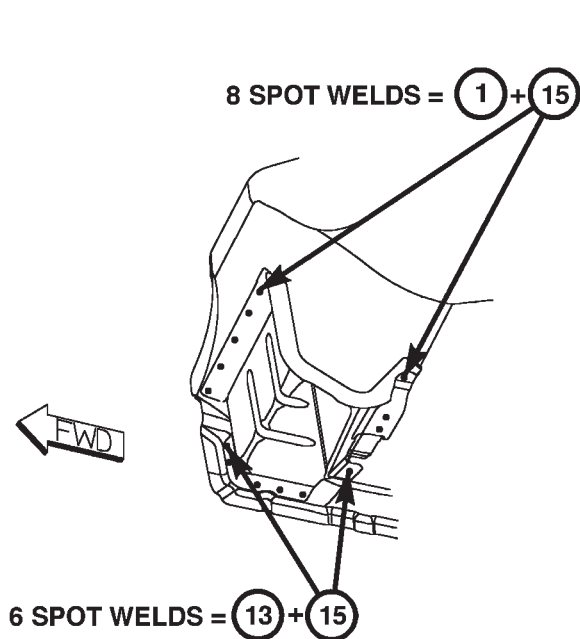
FRONT RAILS - WELD LOCATIONS
